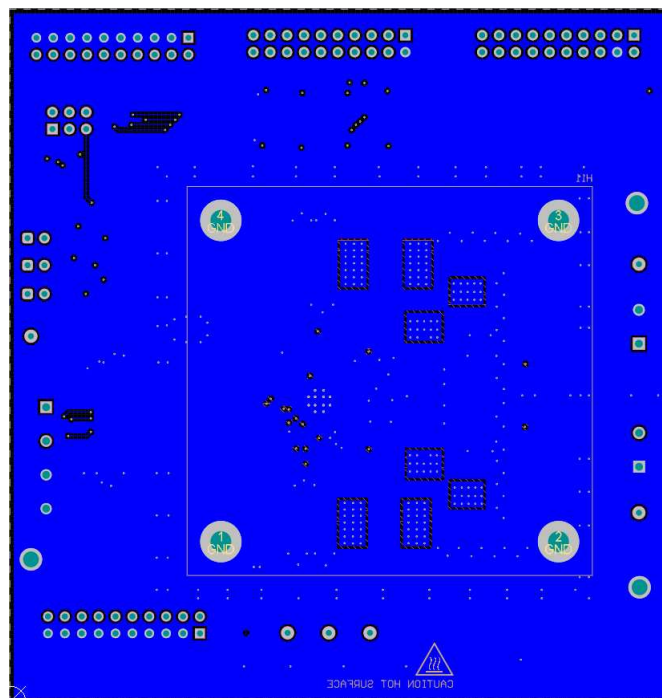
TPS92682EVM-069 bottom layer and bottom overlay (Bottom View)
